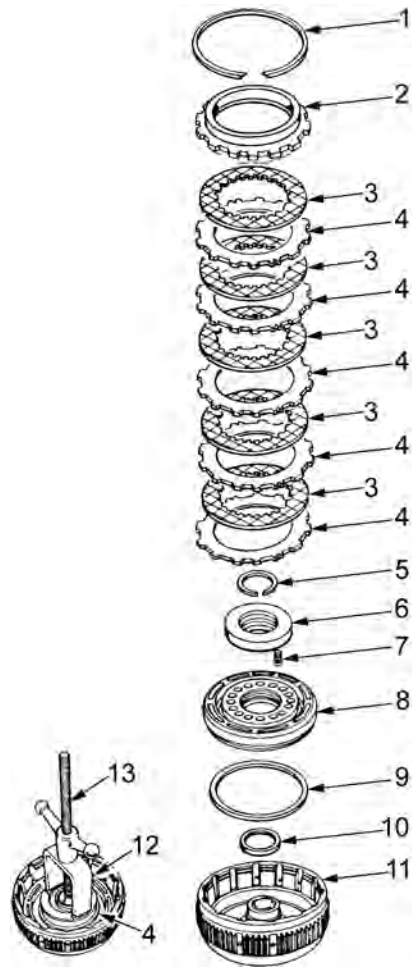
Fourth and Reverse Clutch Housing Assembly Components Removal.
